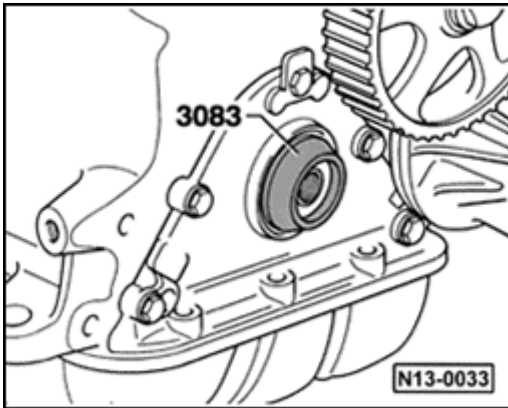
Installing Guide Sleeve From 3083 Onto Crankshaft Journal
